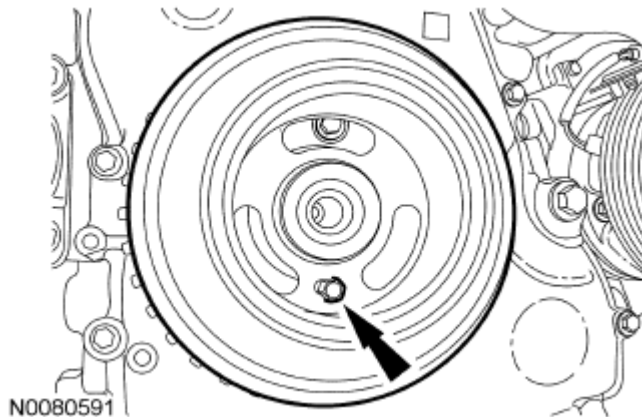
Locating Crankshaft Pulley Hole Bolt (6 mm x 18 mm)
